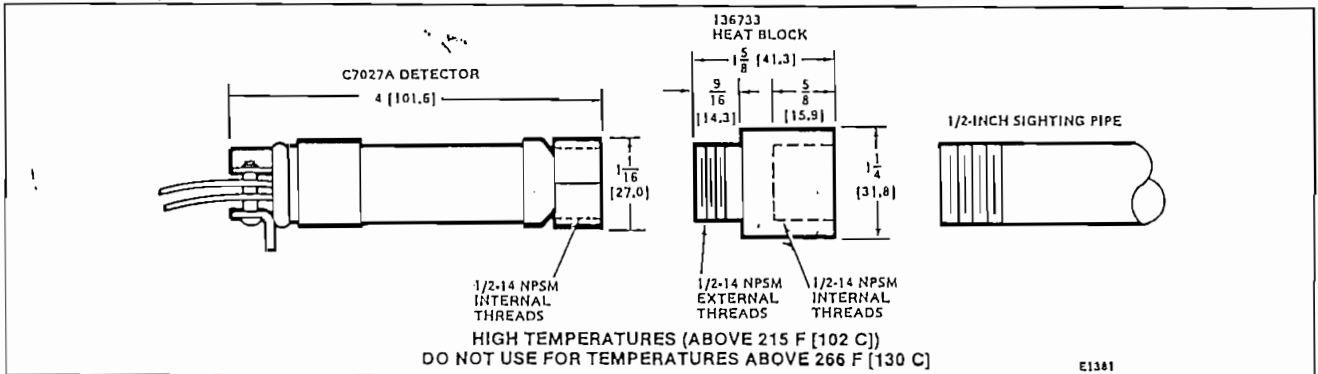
MOUNTING DIMENSIONS OF A 136733 HEAT BLOCK, IN in. [mm IN BRACKETS].
